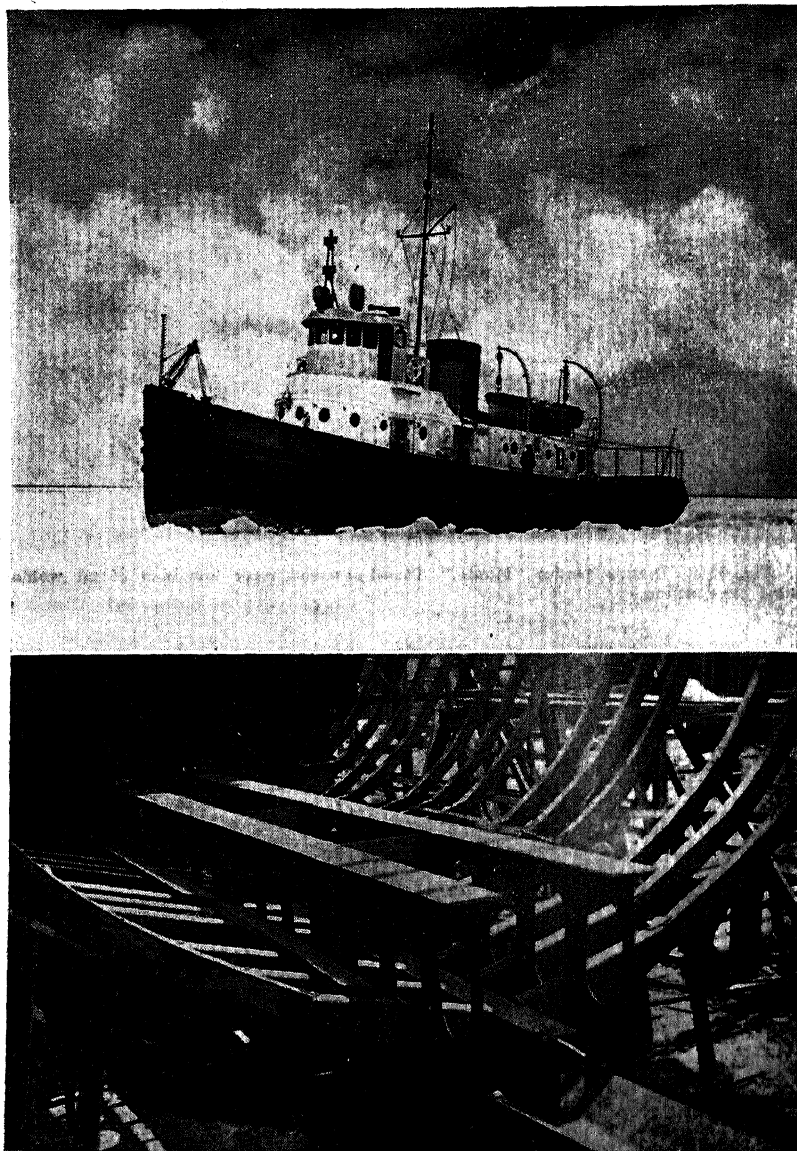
Harbor cutter "Raritan," one of two all welded cutters built at the same time. 110 ft. long. Diesel electric 1000 hp. All welded with transverse framing providing exceptional rigidity, permanent tightness and minimum weight. Below: View during erection showing shop fabricated hull structural members.
